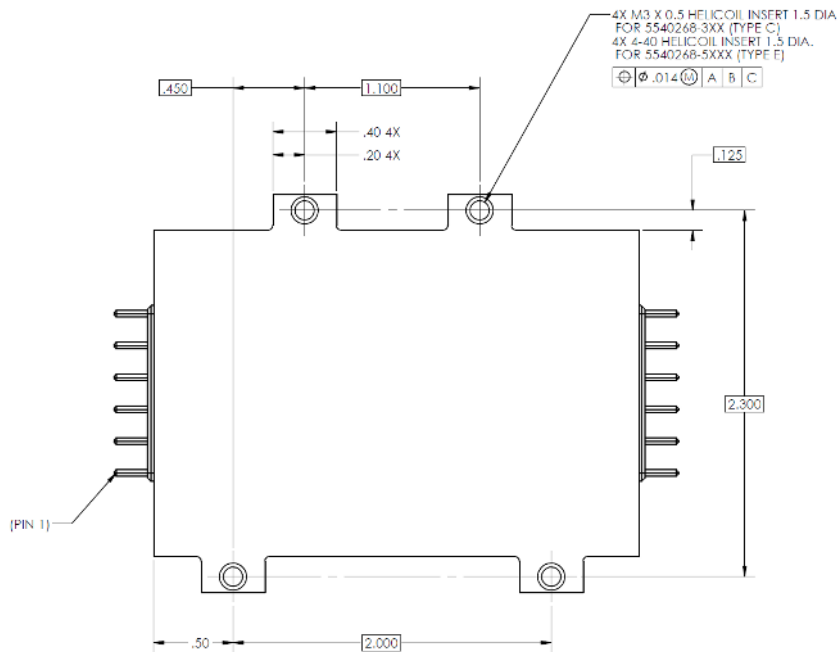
Axial Pins and Thru-hole Tabs Bottom View
